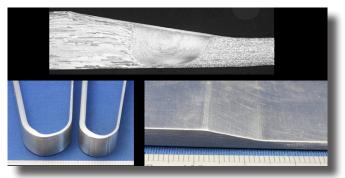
Example of a joint made between 4mm and 2 mm thick AA6082 sheet. The macrograph (upper) shows the weld to be defect free and the root and face bend test samples (lower left) attest to its mechanical integrity. The smooth transition between the two different thicknesses of material is shown lower right.
